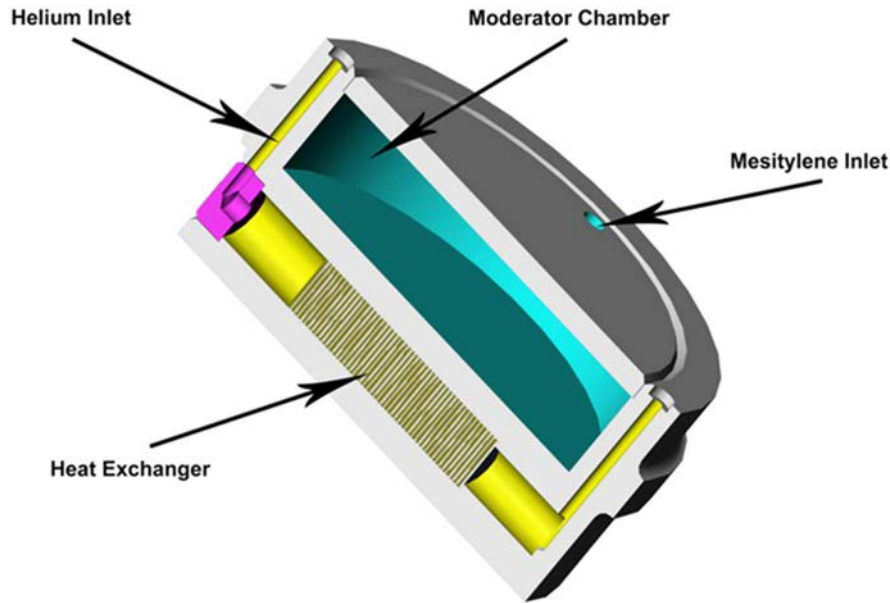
Detail drawing of the PSBR-CNS mesitylene moderator chamber (courtesy of K. Ünlü, PSBR).
